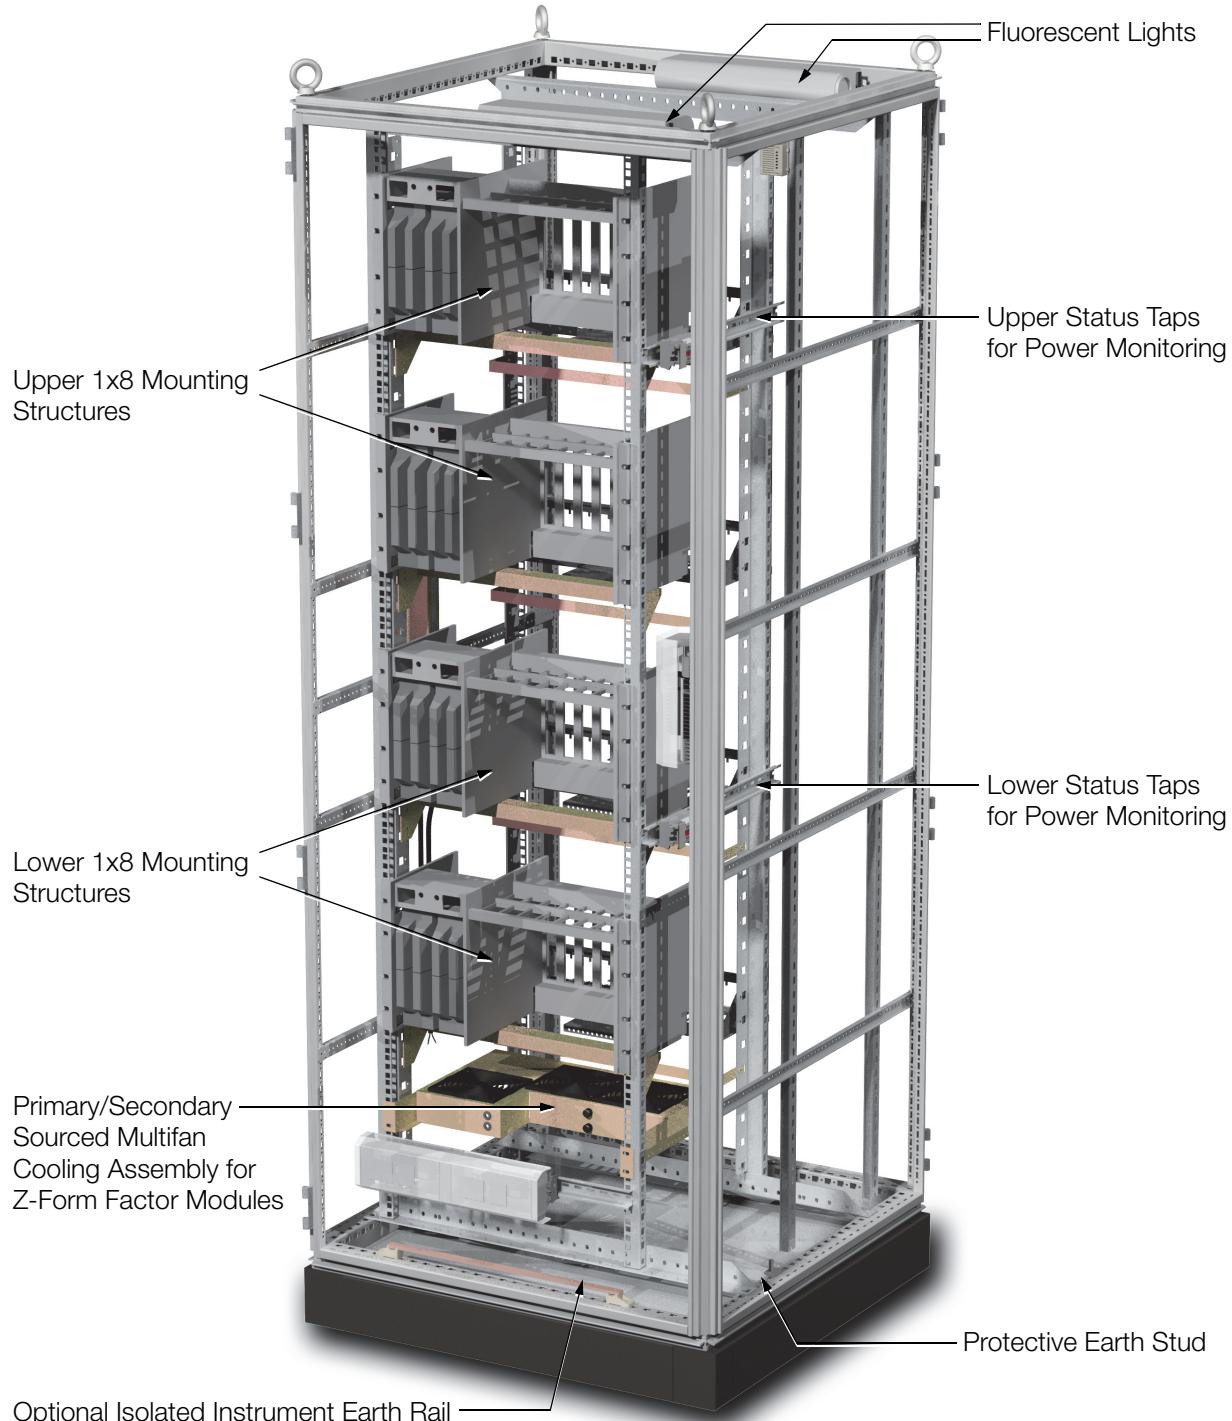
G40 19-Inch Rack Enclosure, Front View With 1x8 Mounting Structure Option
